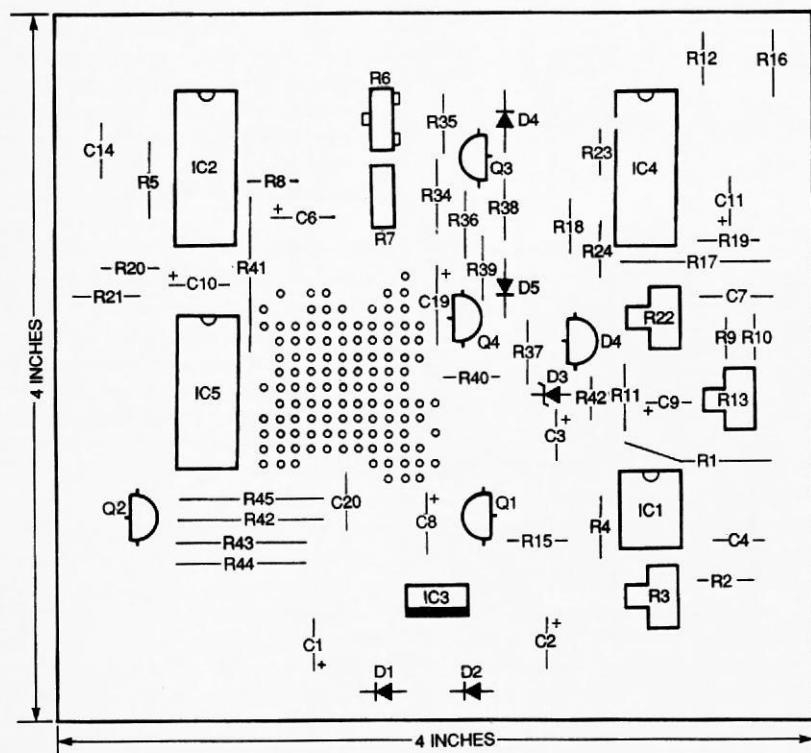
PARTS LAYOUT FOR POINT-TO-POINT WIRING. Position the components in the general locations shown to minimize wire lengths. All DIP-packaged ICs are mounted in sockets.
